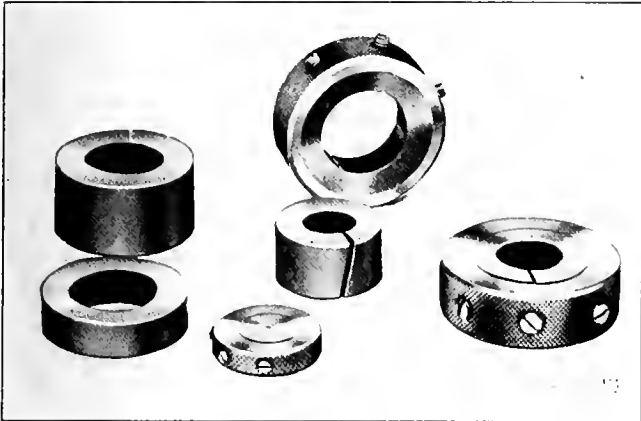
Lap and Lap-holders used for Making Plug Gages
